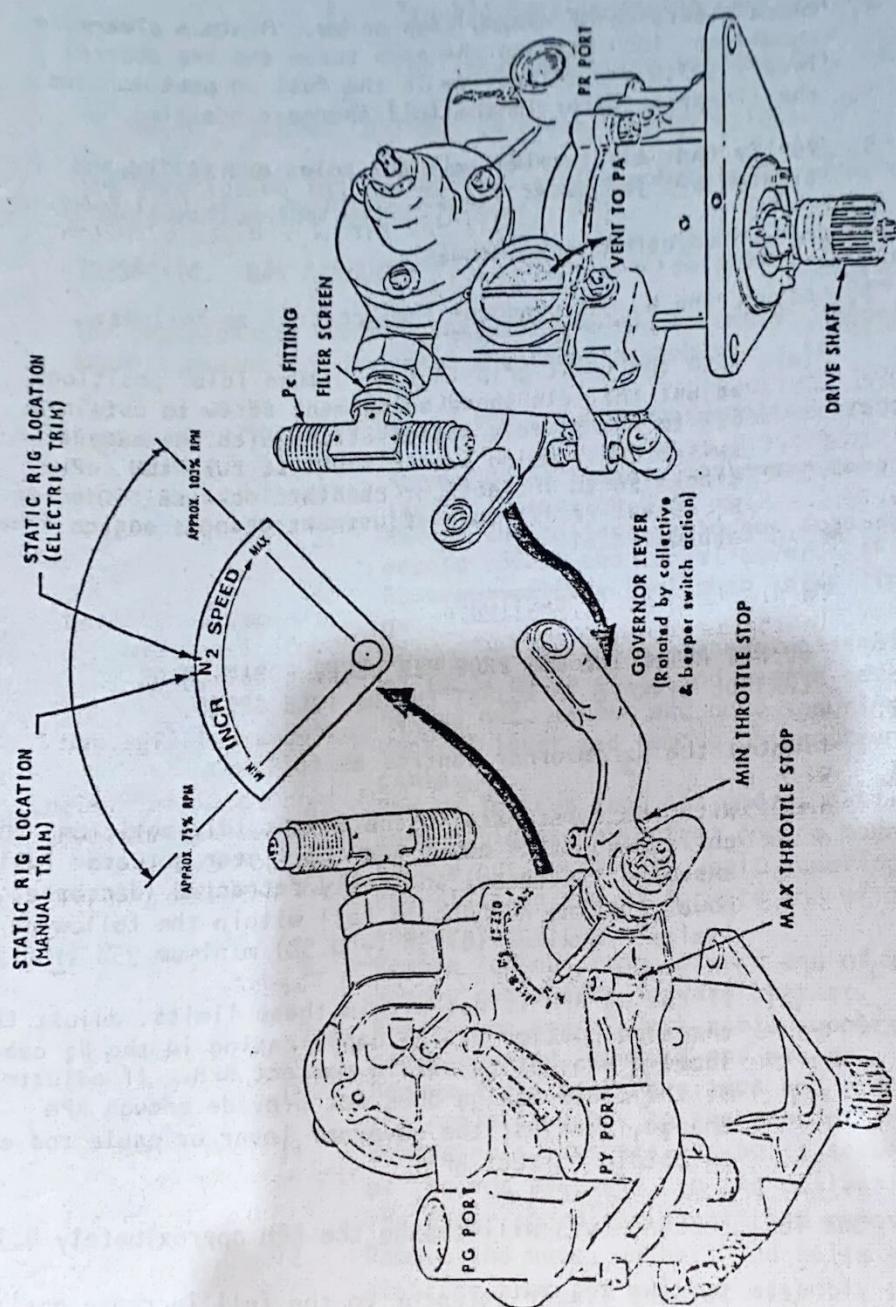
Bendix Power Turbine Governor - Model 250-C20/C20B Engine.
